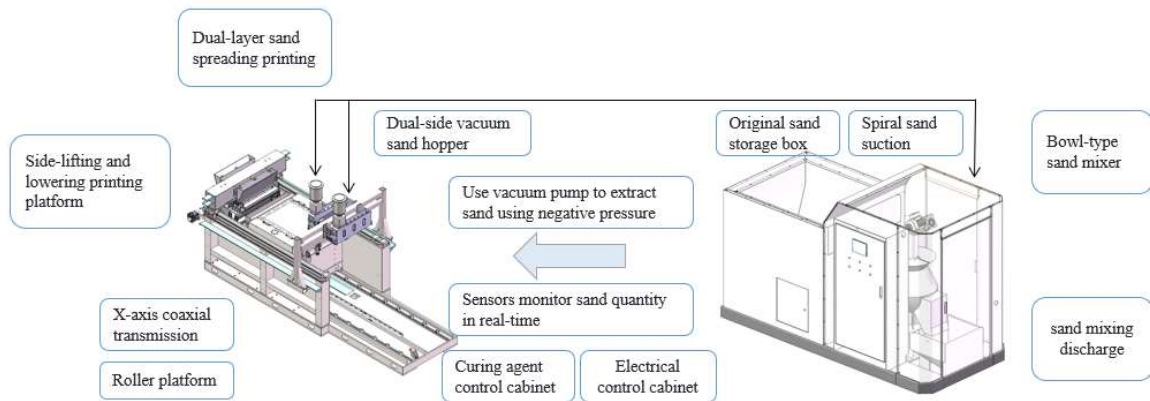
Design concept of multi-material integrated 3D printing equipment
